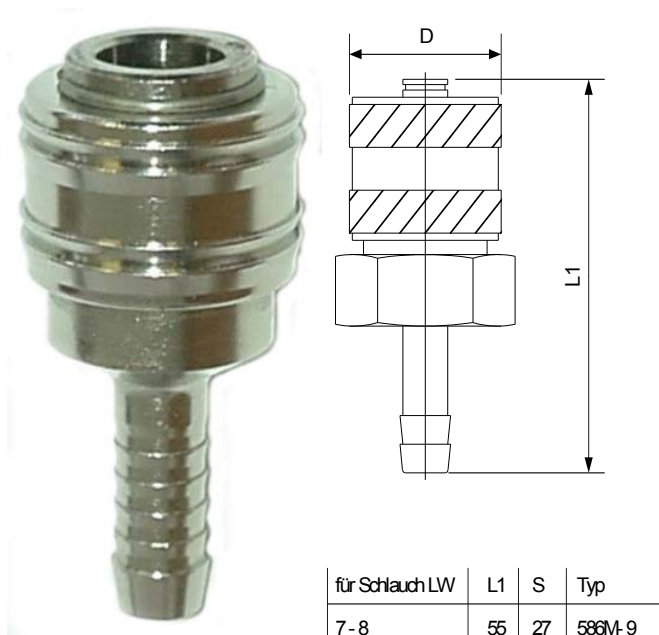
Coupling socket NG 8 (for 7-8 mm pipe)
